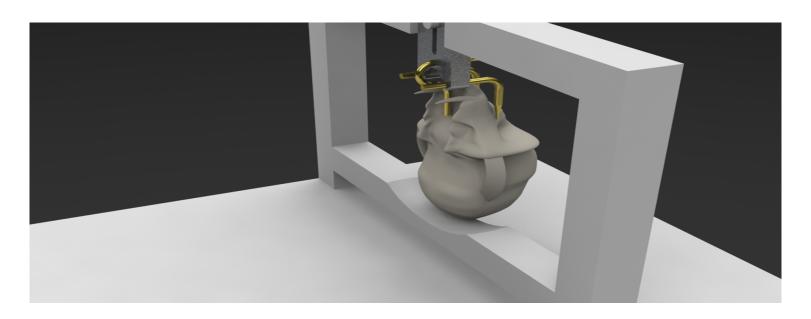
SolidWorks drawing of Eye Bar design. Drawing created by Gabe Bautista [7].
